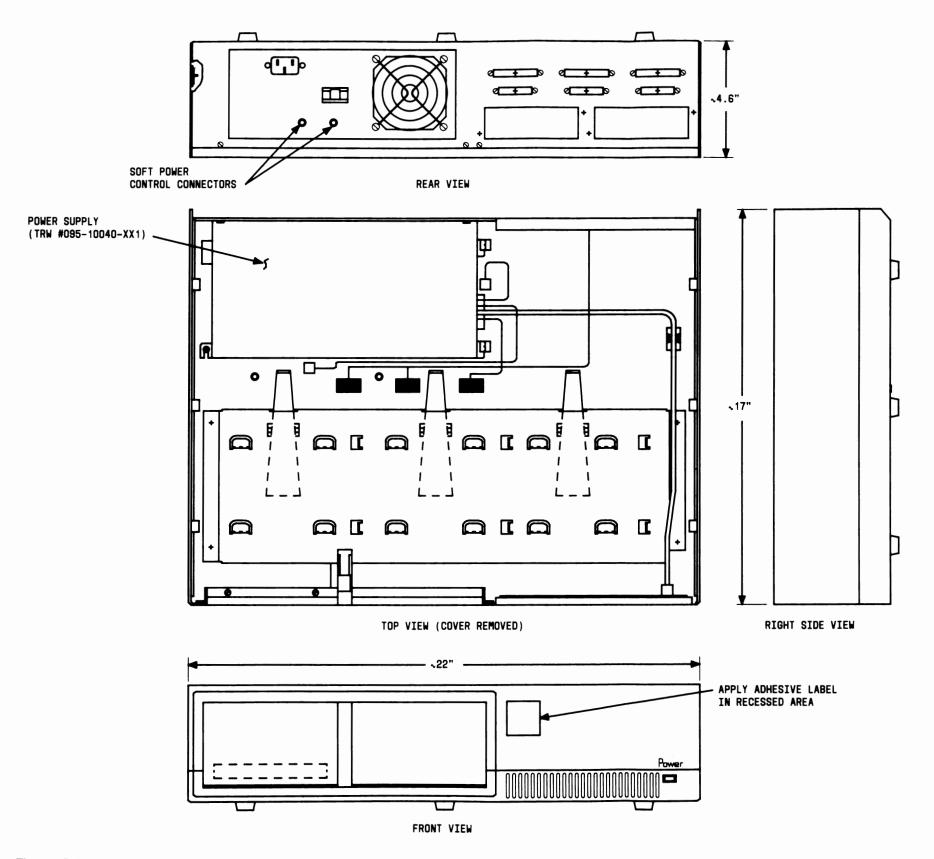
Domestic AT&T/XM Cabinet Assembly Drawing (ED-4C580-30)
